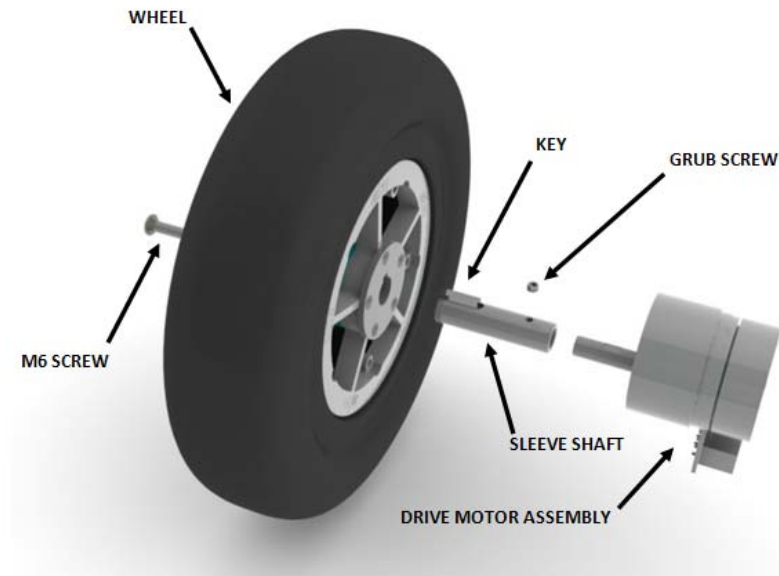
Rendered image of an exploded view of the UGV drive assembly
